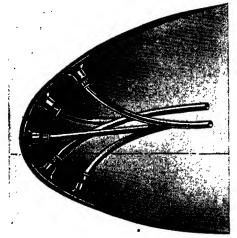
Suction and pressure tubes within the airplane structure. Each tube is connected with an inflatable tube in the de-icer boot. (Courtesy The B. F. Goodrich Company.)
